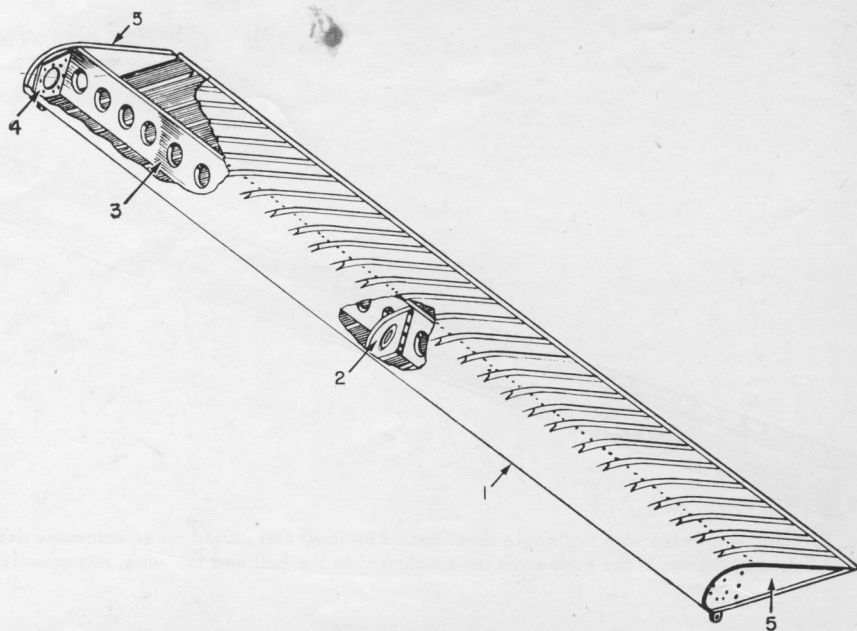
Structural simplicity is notable in this full-slotted flap: (1) single-piece headed wrap-around skin joined at the T.E.; (2) center nose rib for hinge and horn fitting; (3) spar; (4) $\frac{1}{8}$ -in. plate stock hinge fitting; (5) end rib.
